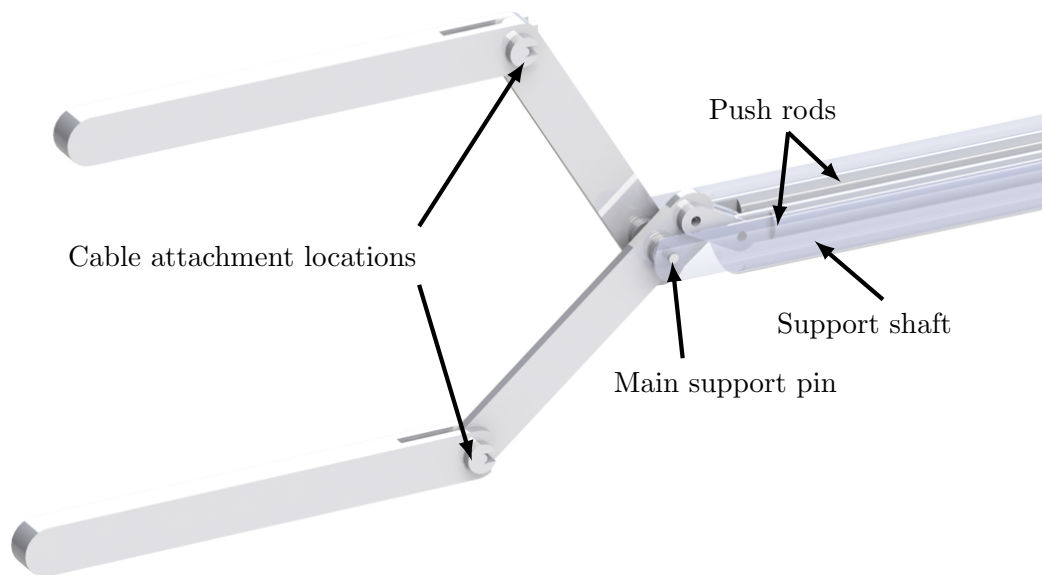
Hybrid cable–push-rod link mechanism. Cables not shown.
